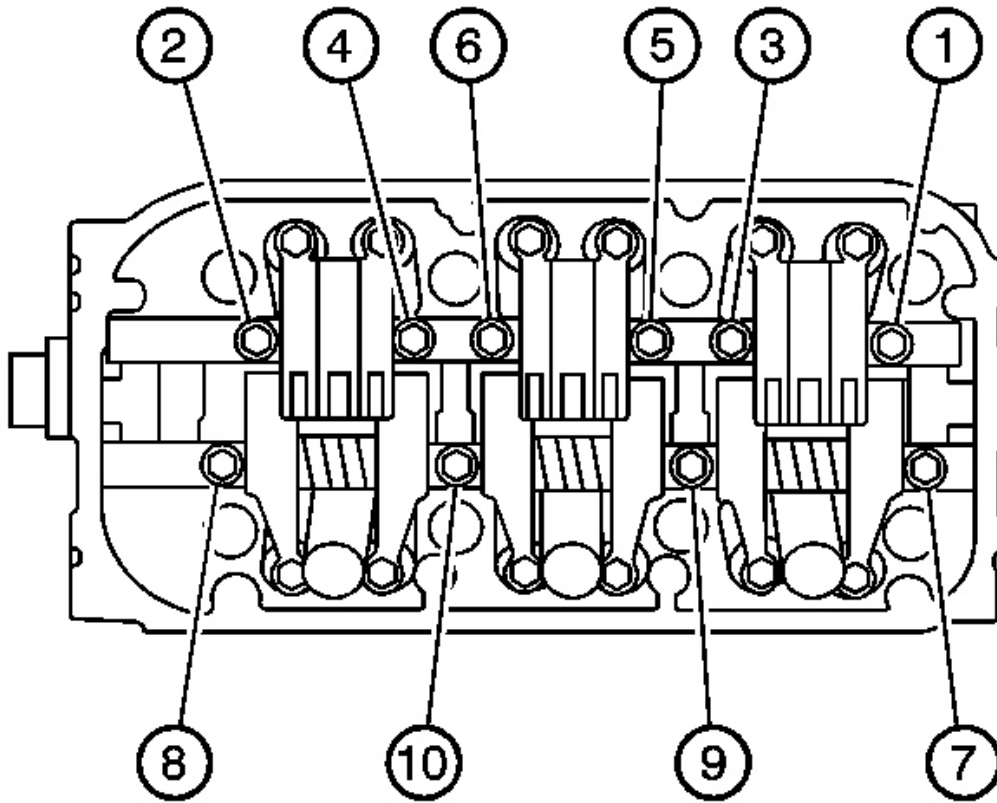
Identifying Rocker Shaft Retaining Bolts
